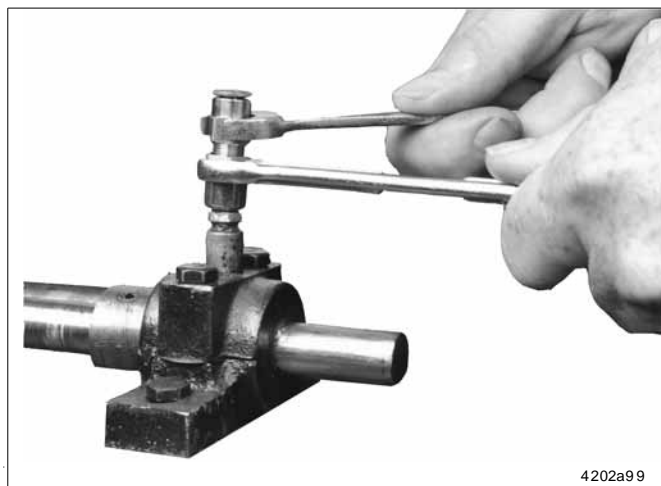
Screwing Quicklinc fitting into the Zerk-Lock body
